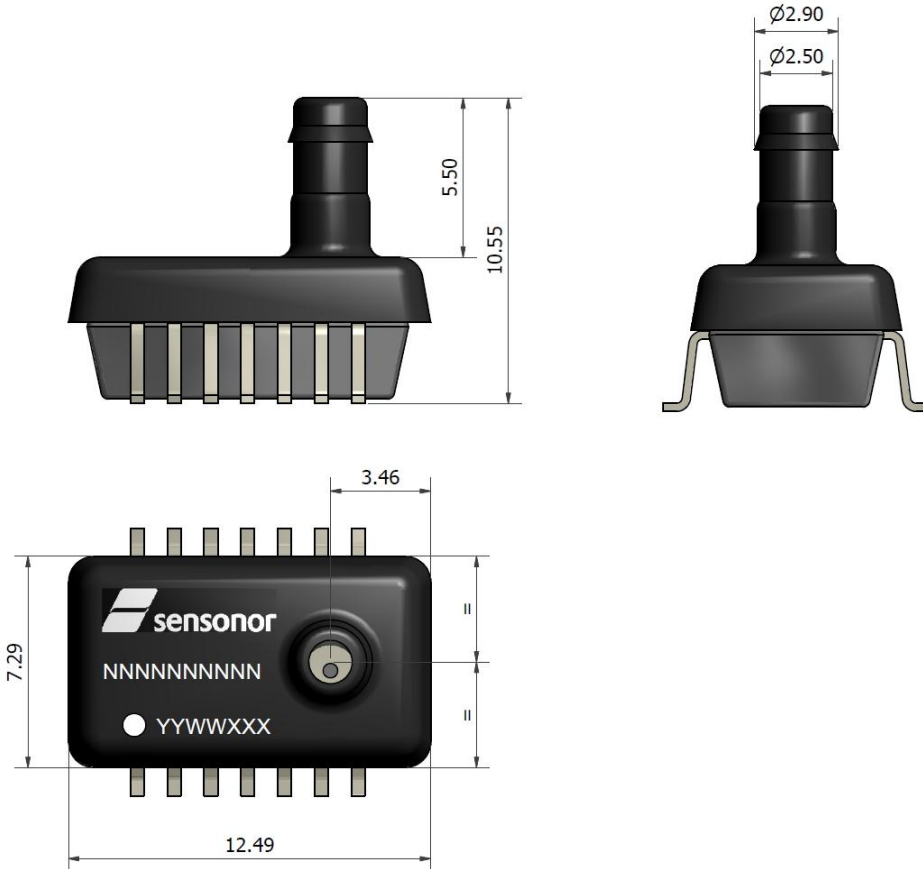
Physical dimensions and laser marking of sensor packages with tube connections (for sensors with the letter ‘T’ included in the product name)
